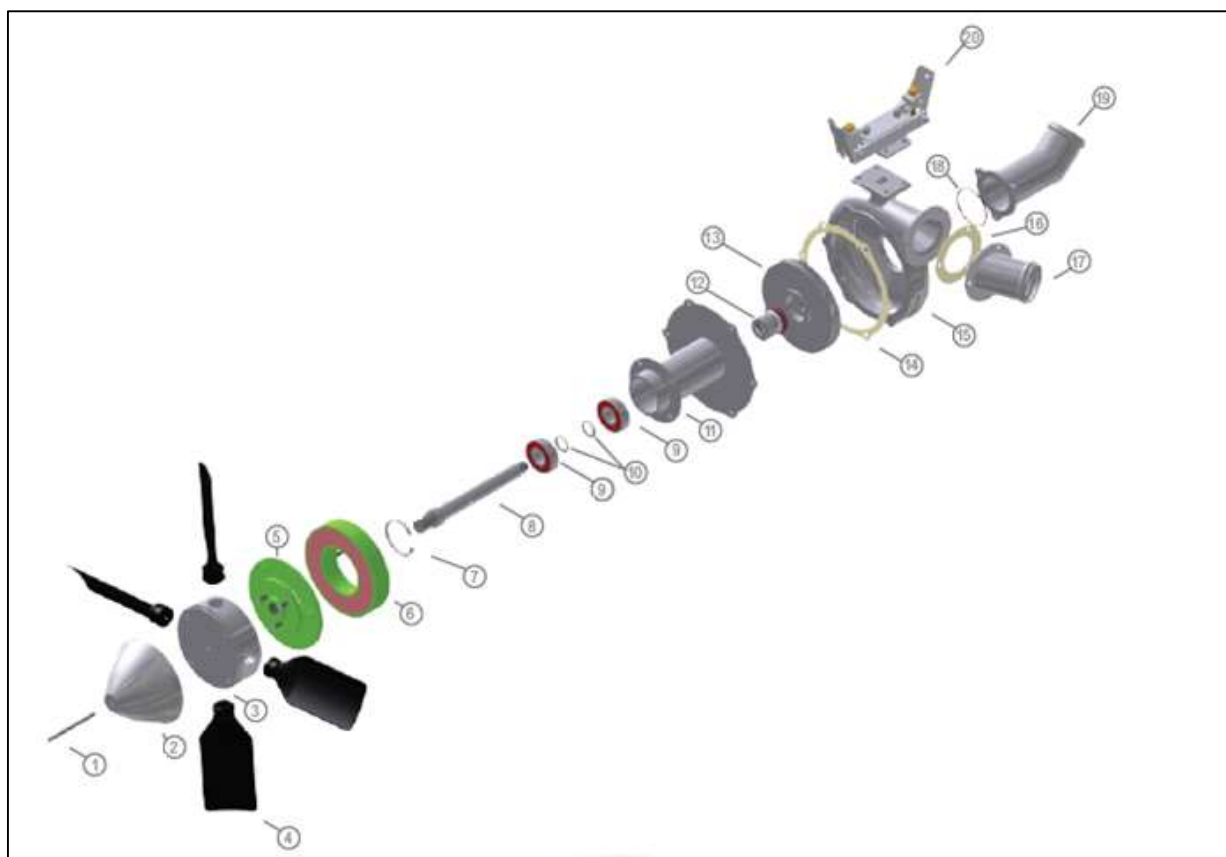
Zanoni Equipamentos® spray pump (exploded view - illustrative picture).
